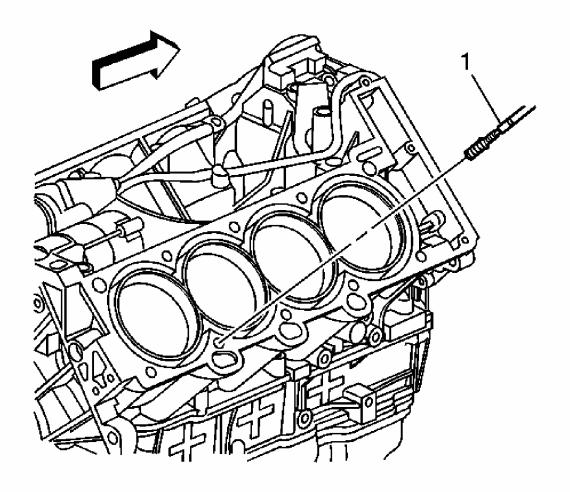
Installing Insert & Installation Driver - Outboard Bolt Holes Courtesy of GENERAL MOTORS CORP.
